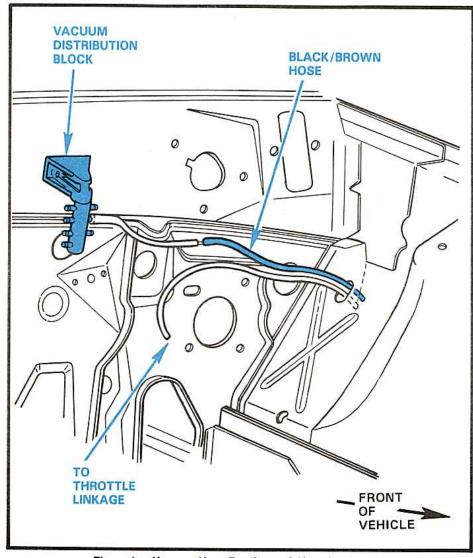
Vacuum Hose Routing — 3.8L and 5.0L Engines
